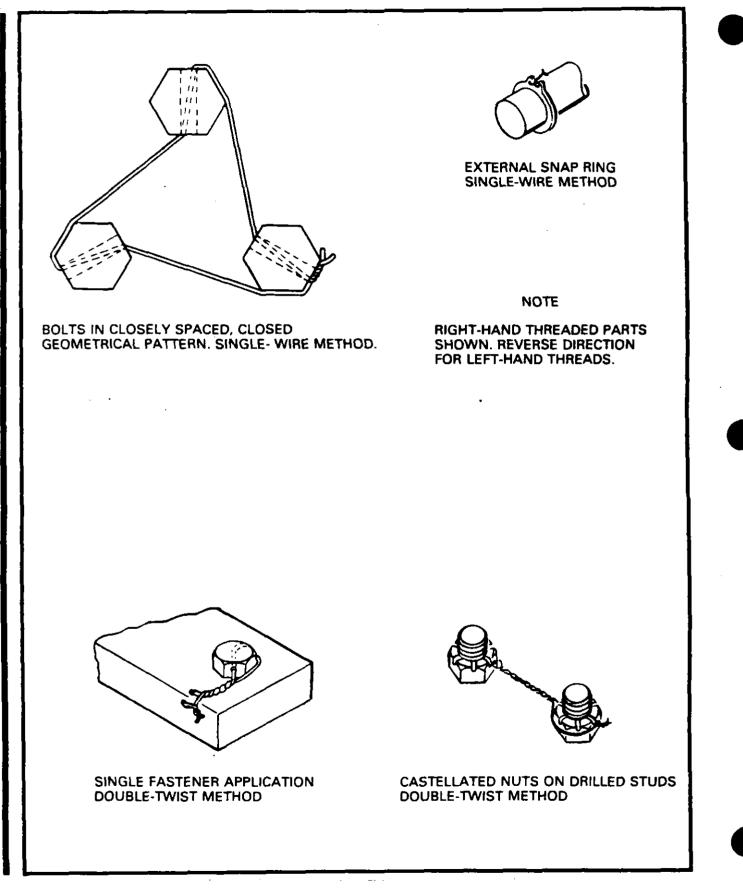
Lockwire Safetying (Sheet 1 of 2)
